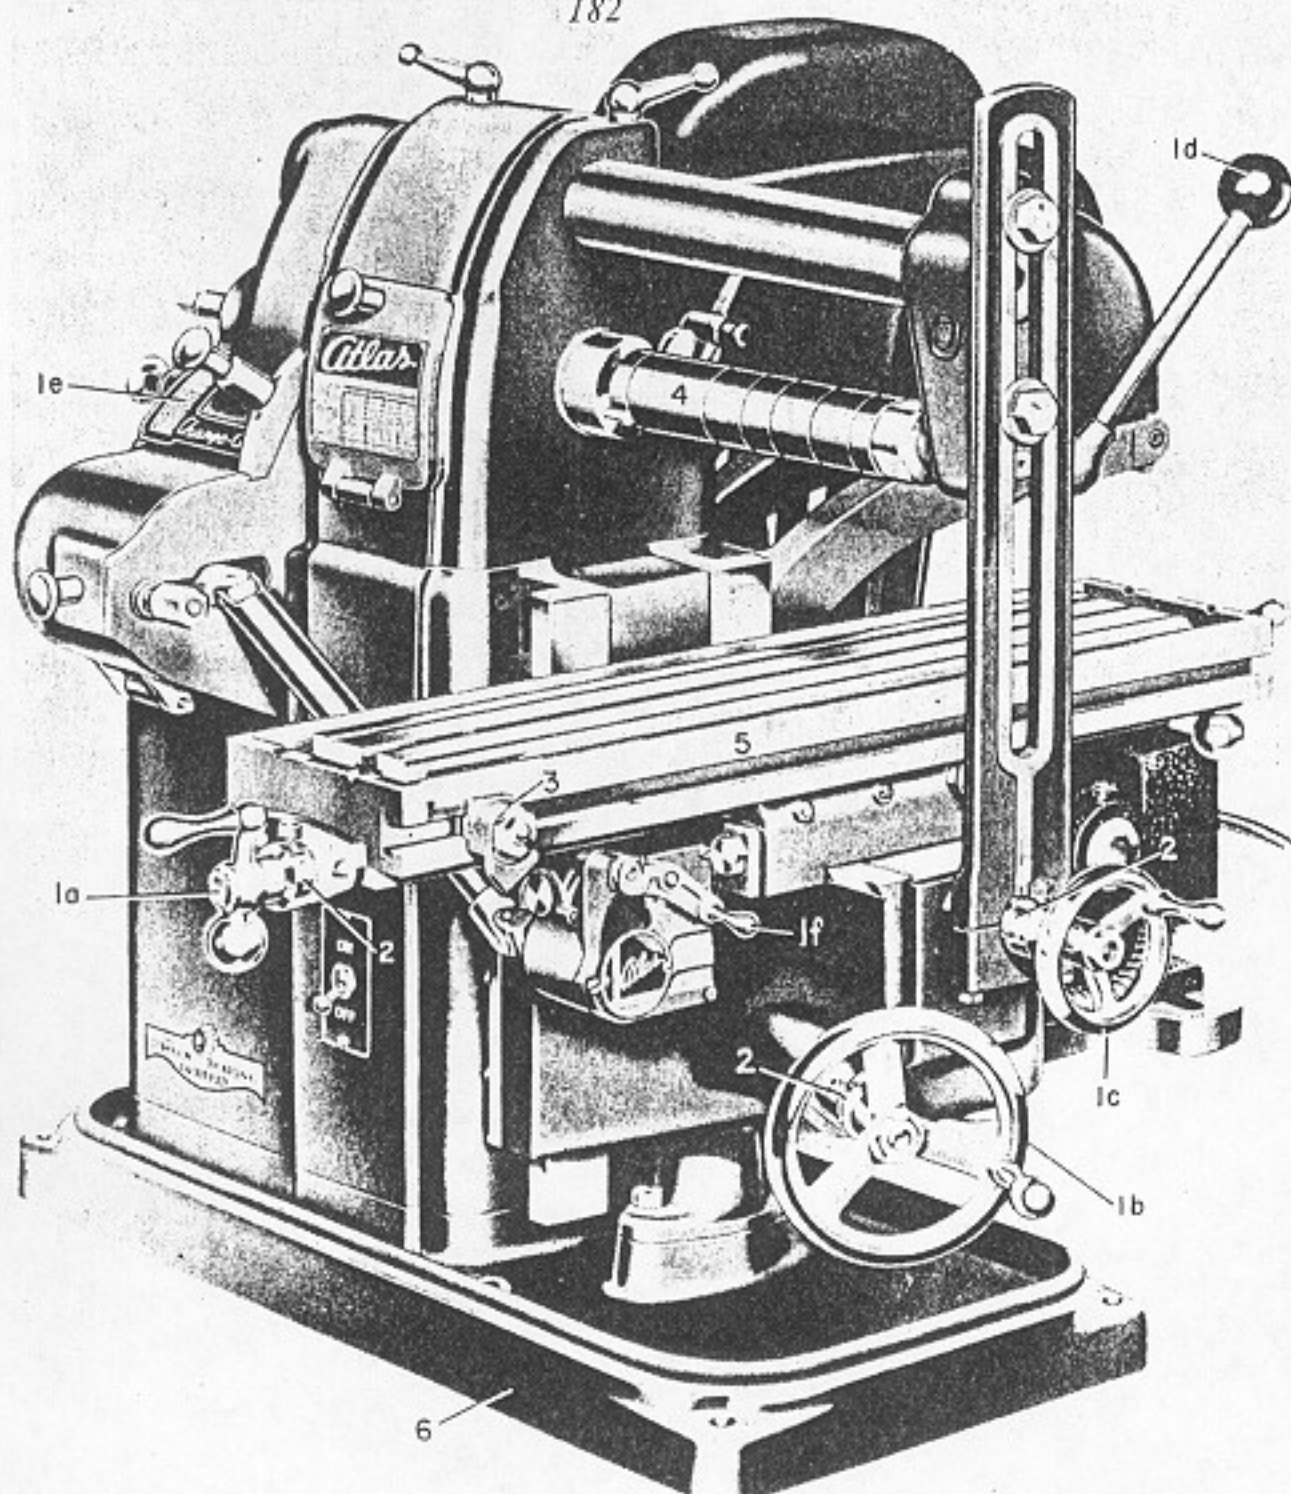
Bench Milling Machine. (Courtesy Atlas Press Co.)
